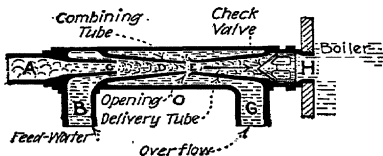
Sectional view of element illustrating the principle of operation of an injector.
